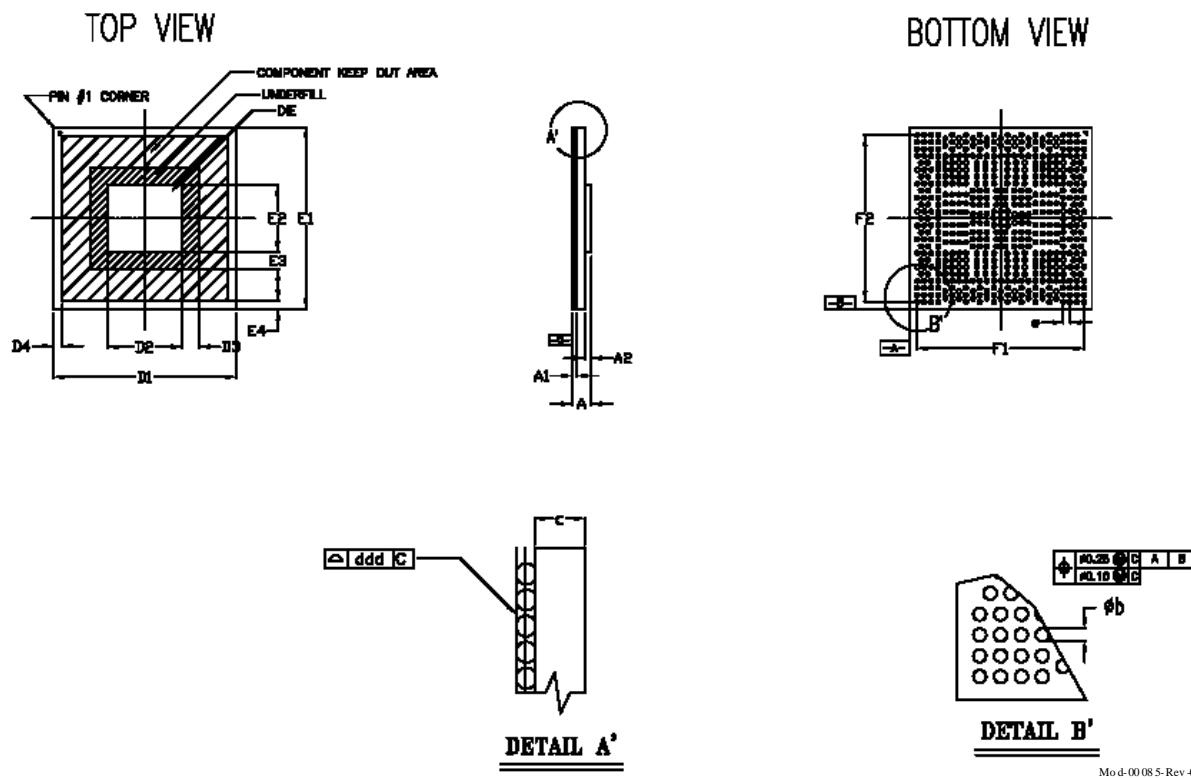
RX881 528-Pin FCBGA Package Outline
